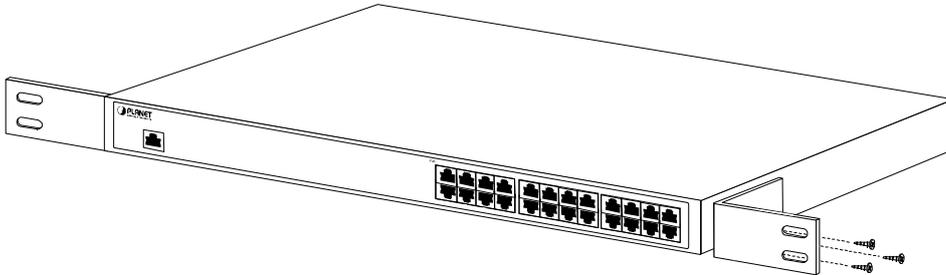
Brackets attaching to the PoE Injector Hub
